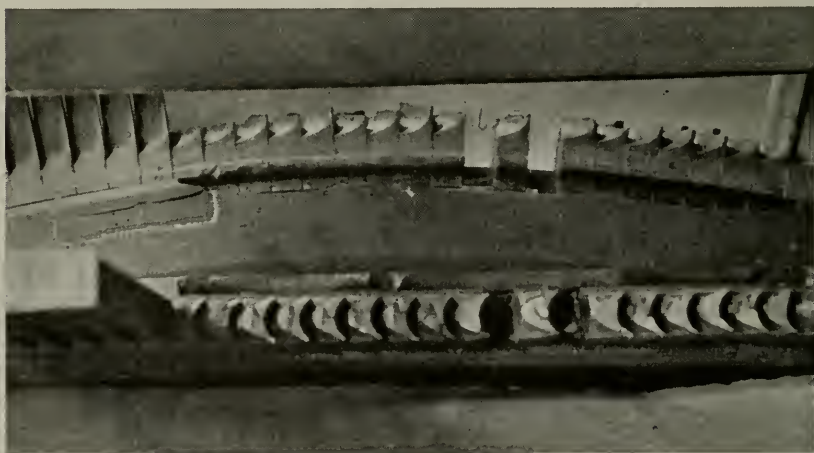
Taken with the aid of a mirror, this picture gives a close-up view of both the top and one side of the broken section in the turbine rotor shown in Figure 1.
